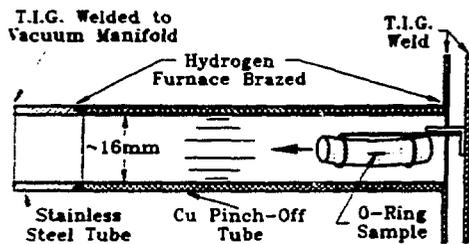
Copper Pinch-off Assembly Used to House O-Ring Test Sample for Extended Vacuum Exposure.
